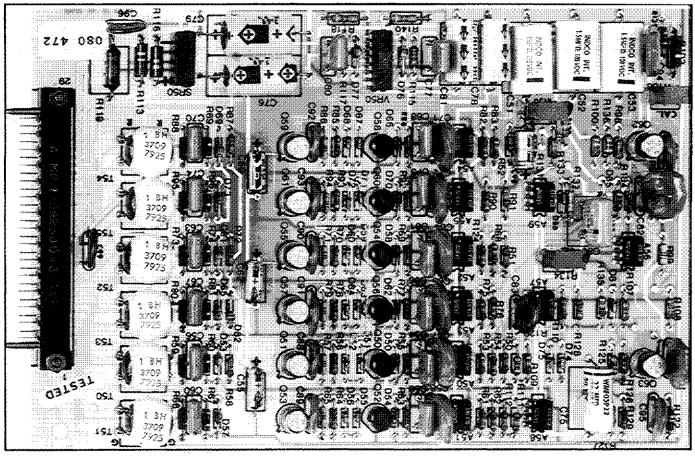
TYPICAL PRINTED CIRCUIT BOARD
